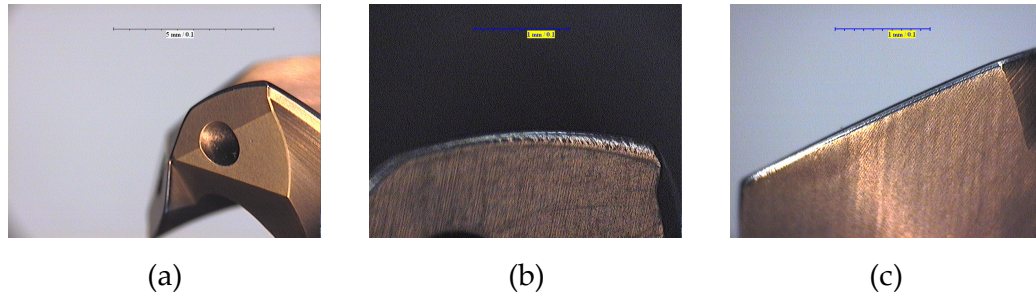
Tool Wear in Drilling of CFRP ($S=4500$ rpm, $f=457$ mm/min) (a) Overall (b) Flank Wear (c) Crater Wear
